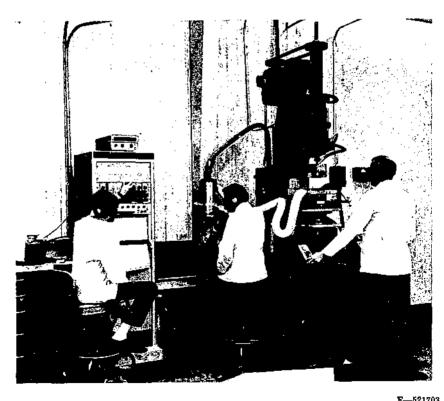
The boring machine, with oscillograph at left. Technician in the center is collecting chips.
